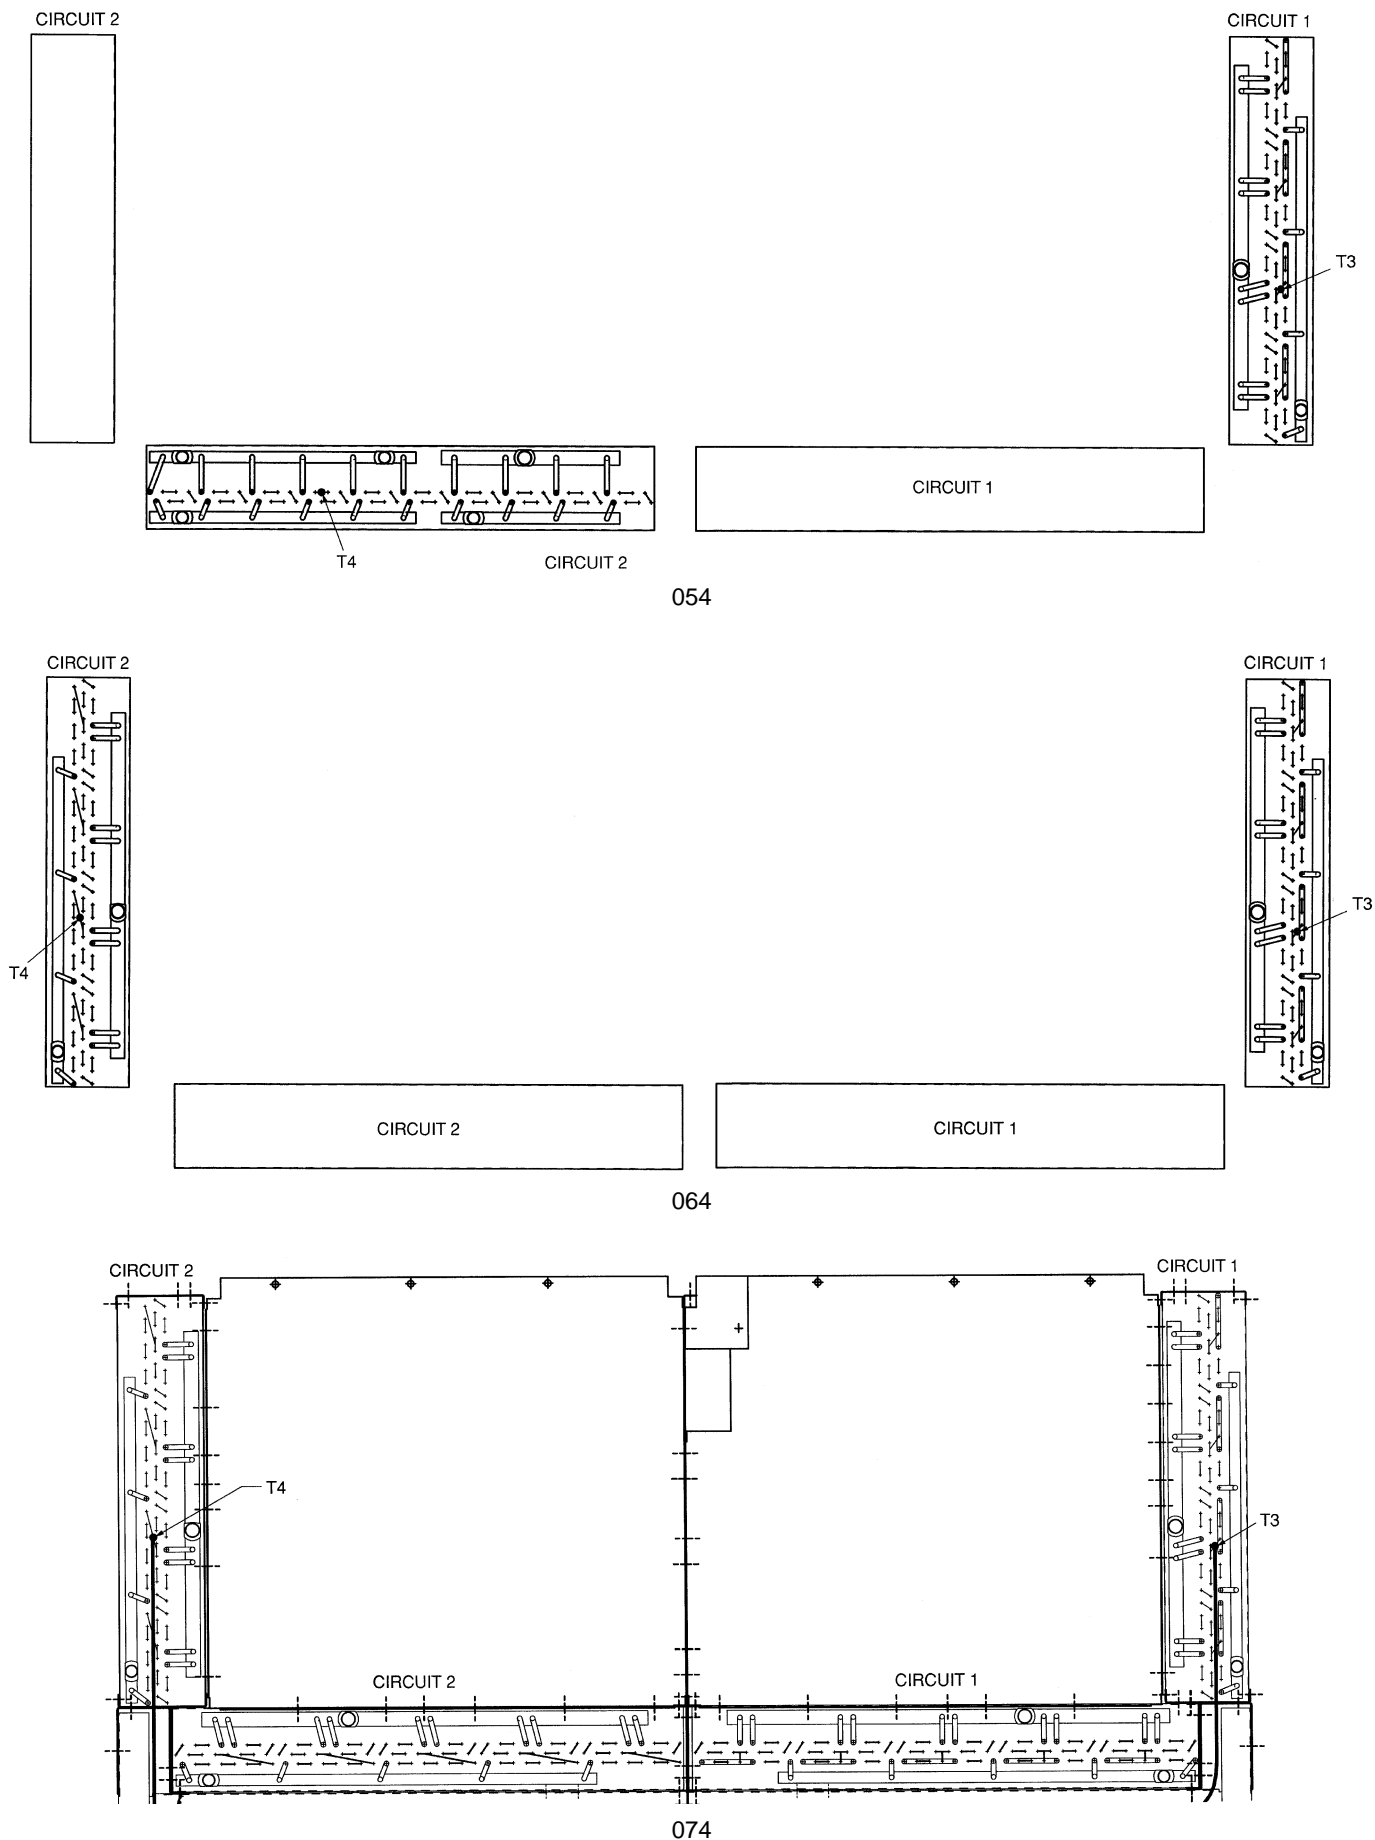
Thermistor T3 and T4 Locations, Size 054-074 Units; Header End of Coil
